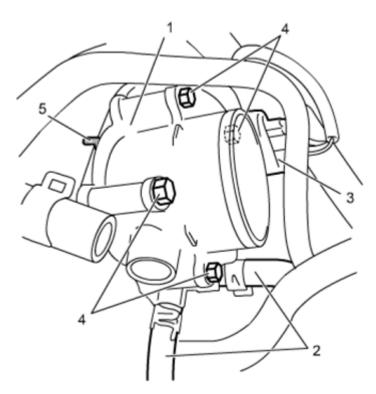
Identifying Air Cleaner Outlet Hose Courtesy of SUZUKI OF AMERICA CORP.
